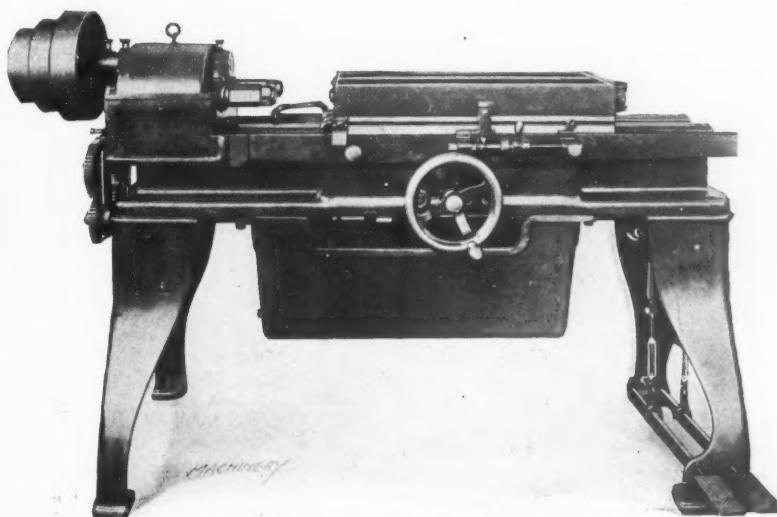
Short Machine for Use in reaming Rifle Receivers
